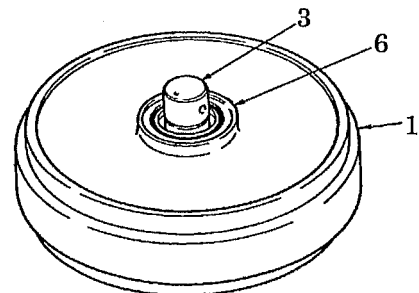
Inserting idler (1) and installing floating seal (6)
